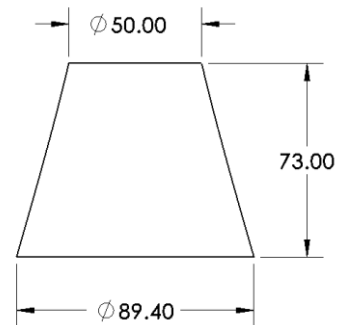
Conical Frustrum Shape Preform with Large Bottom (Case 2)
